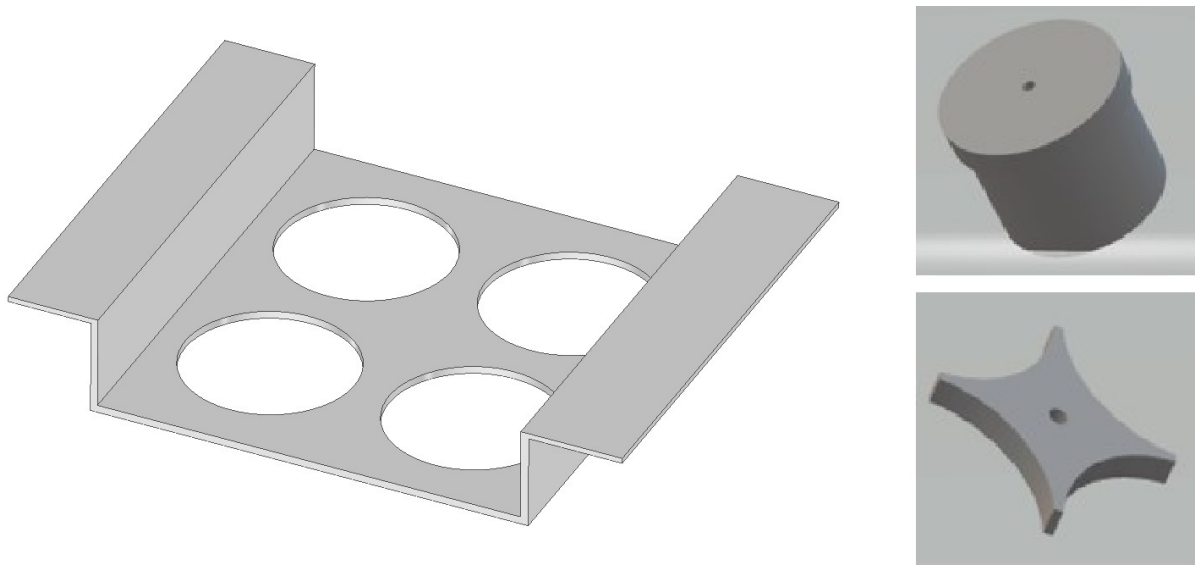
The stopper shaped (a) and star shaped (b) holder designed for the thermocouple fixing
